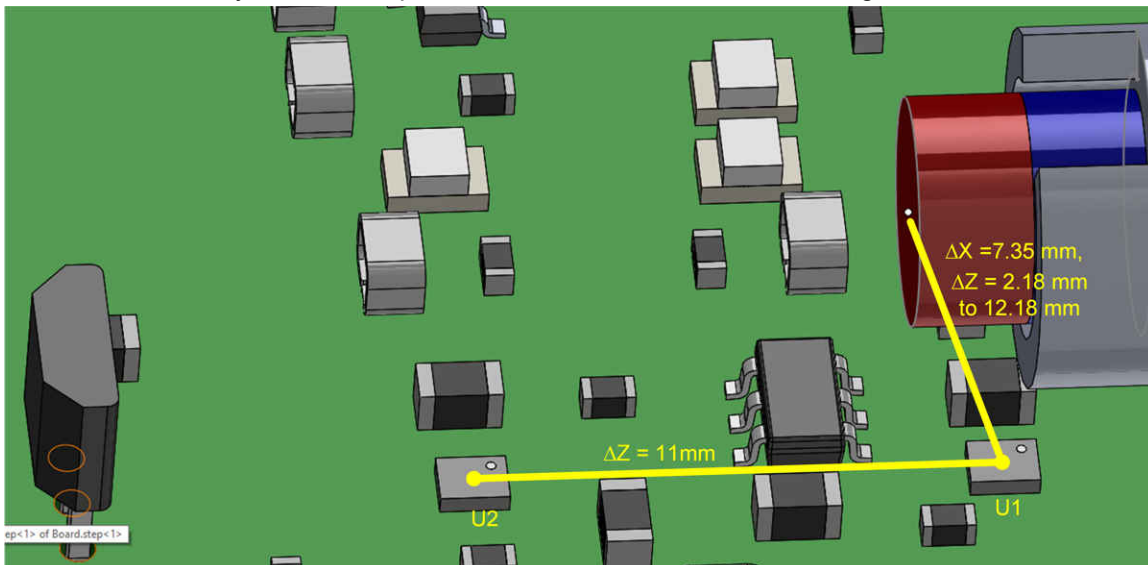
Zoomed and Rotated View of Board Within 3D Printed Trigger Module
